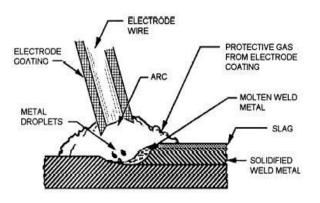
Shielded metal arc welding(www.corrosionist.com)
